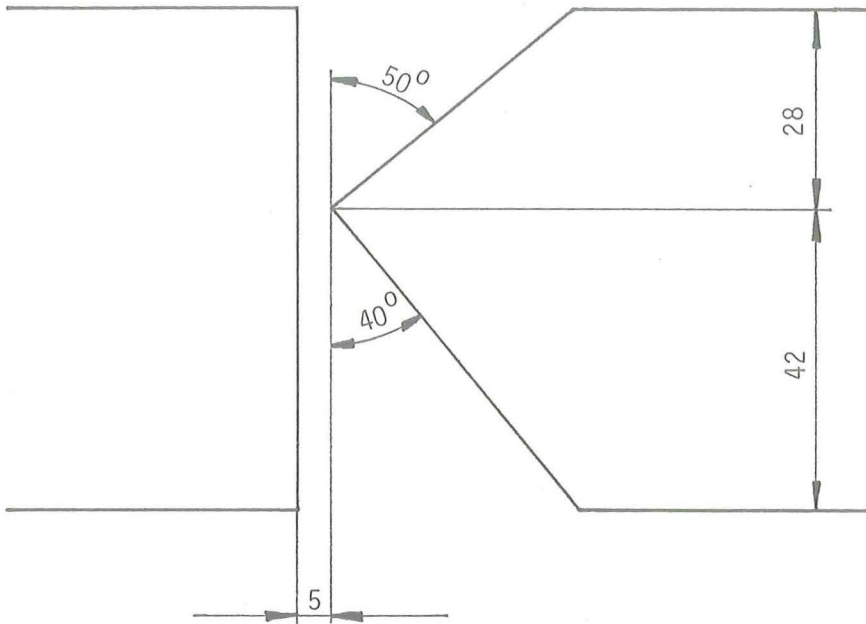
a Joint preparation for K-weld
